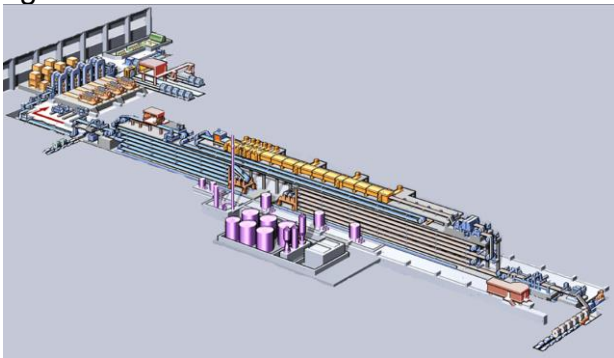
Layout of PLTCM and Tension leveler (scale breaker) point installation.
